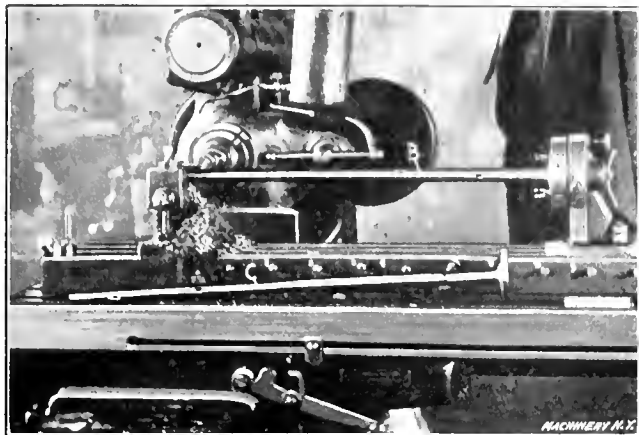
Fixture for Holding Cam-shafts while Milling for Woodruff Keys
